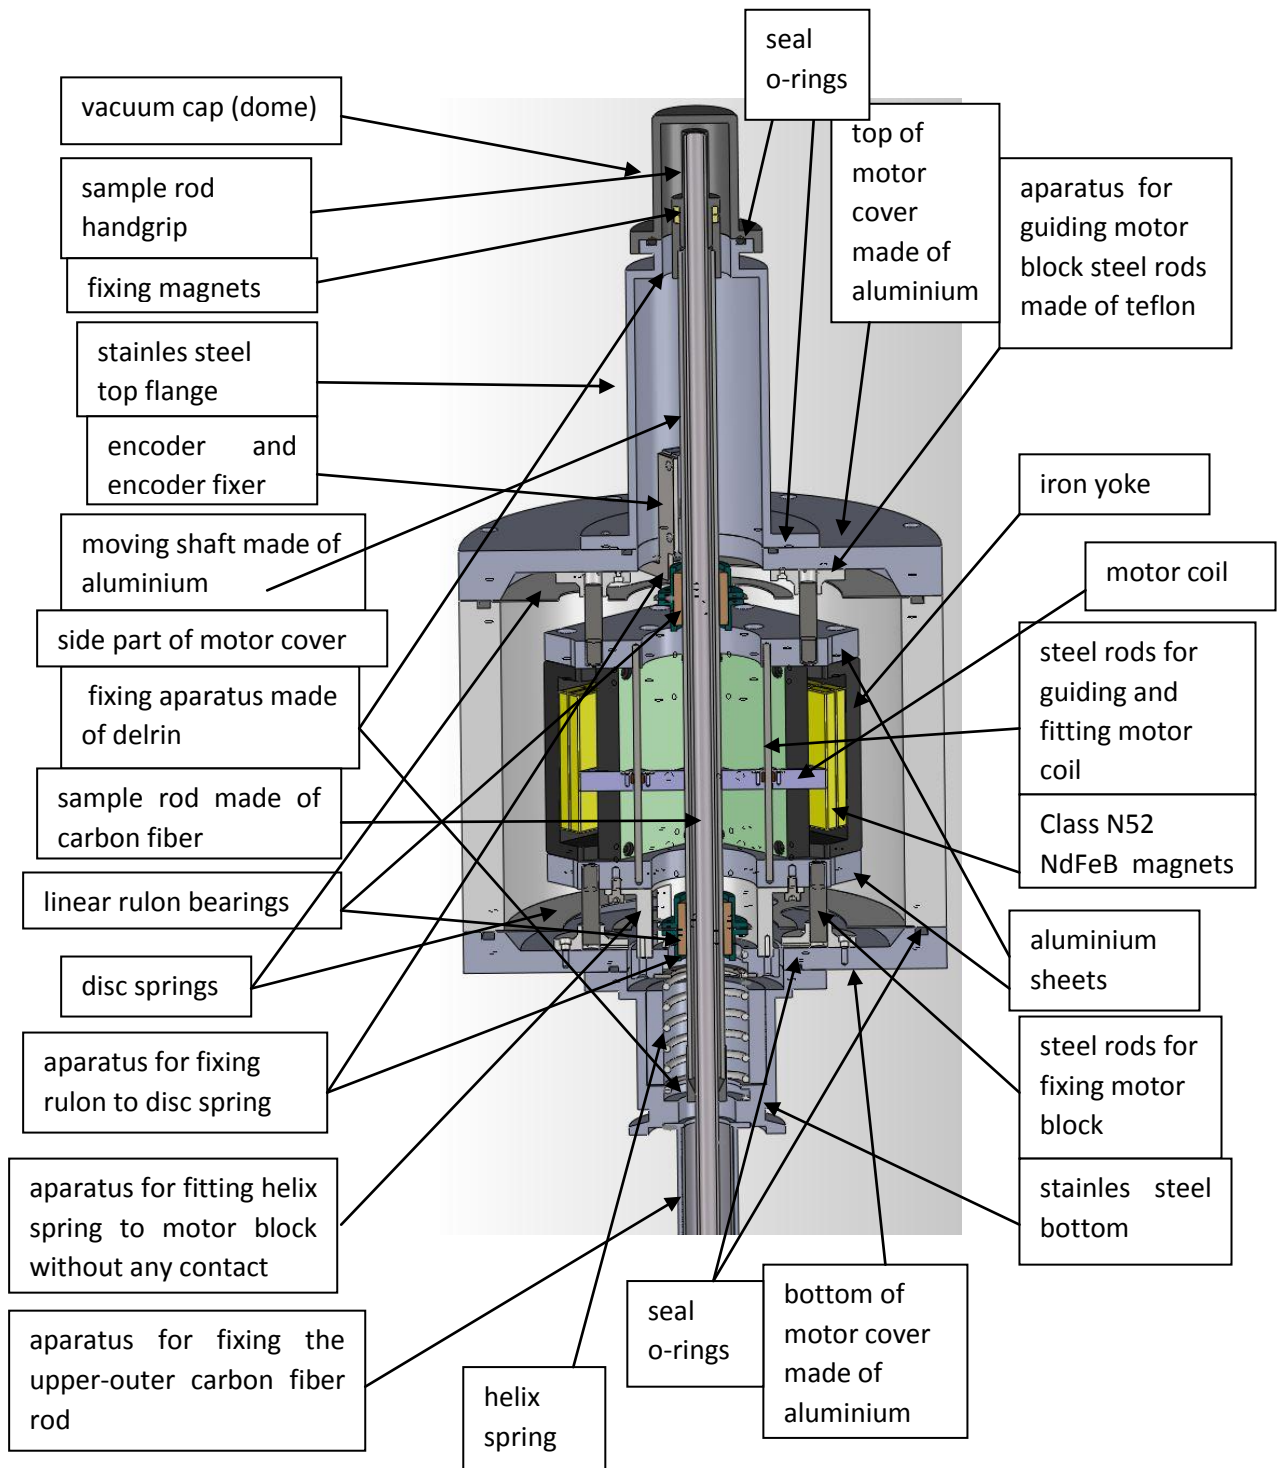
Detailed description of the linear motor design in cross-section view.
